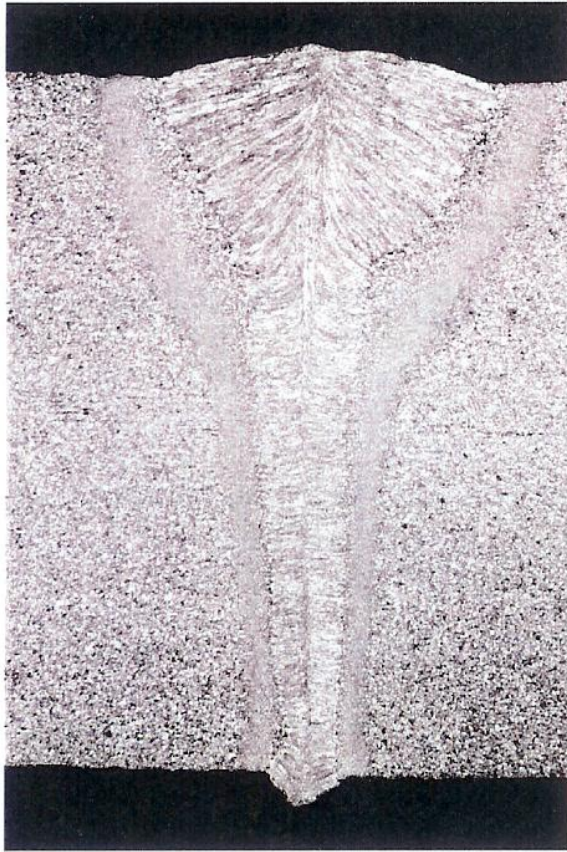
Laser coldwire welding at Volkswagen
